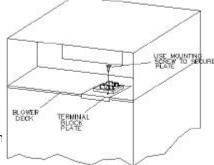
TERMIMAL BLOCK INSTALLATION
